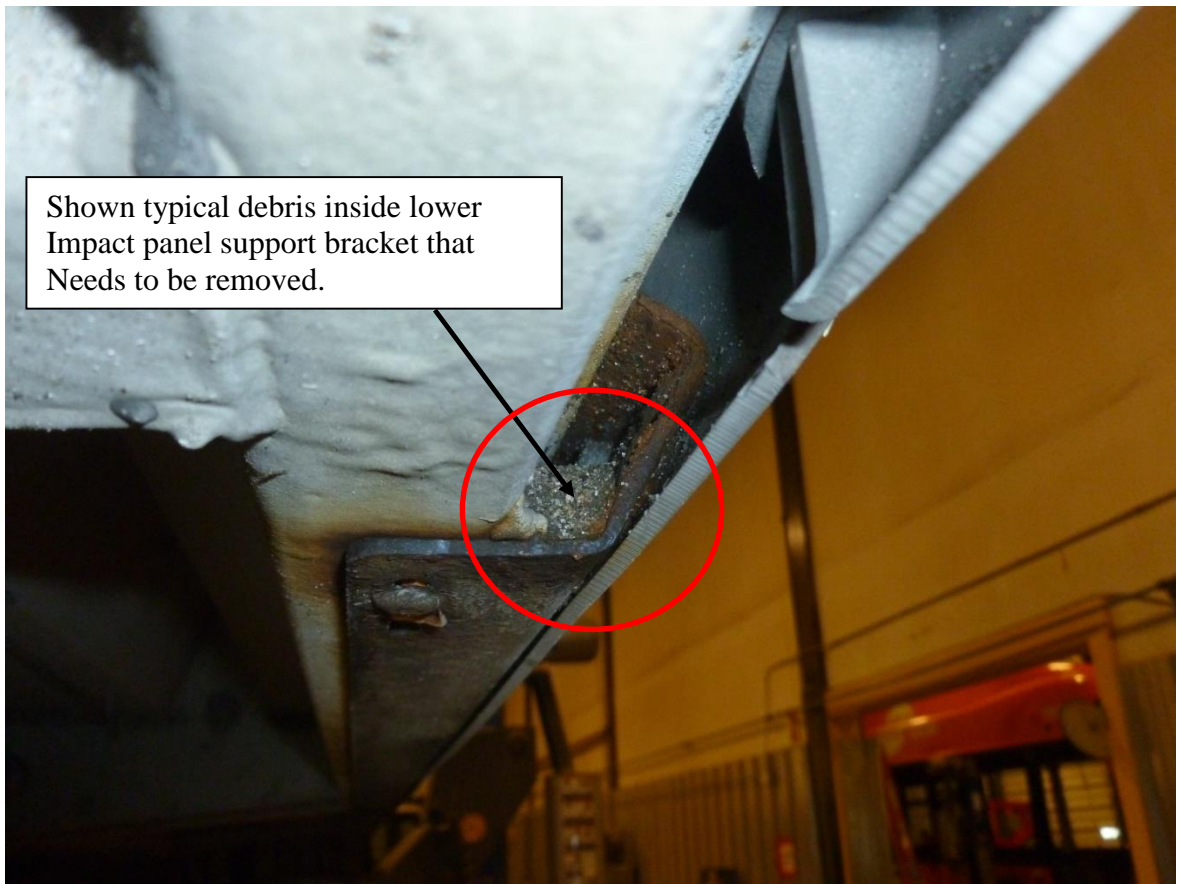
TYPICAL VIEW OF DEBRIS INSIDE OF LOWER IMPACT MOUNTING CHANNEL.
